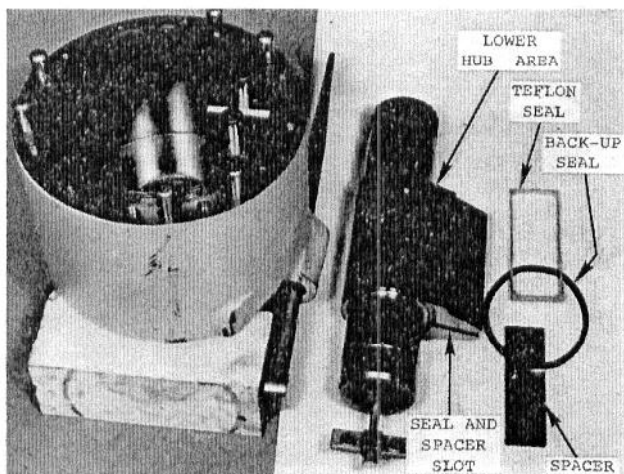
Moving Vane Shaft (and Related Parts) Removed From Cylinder
